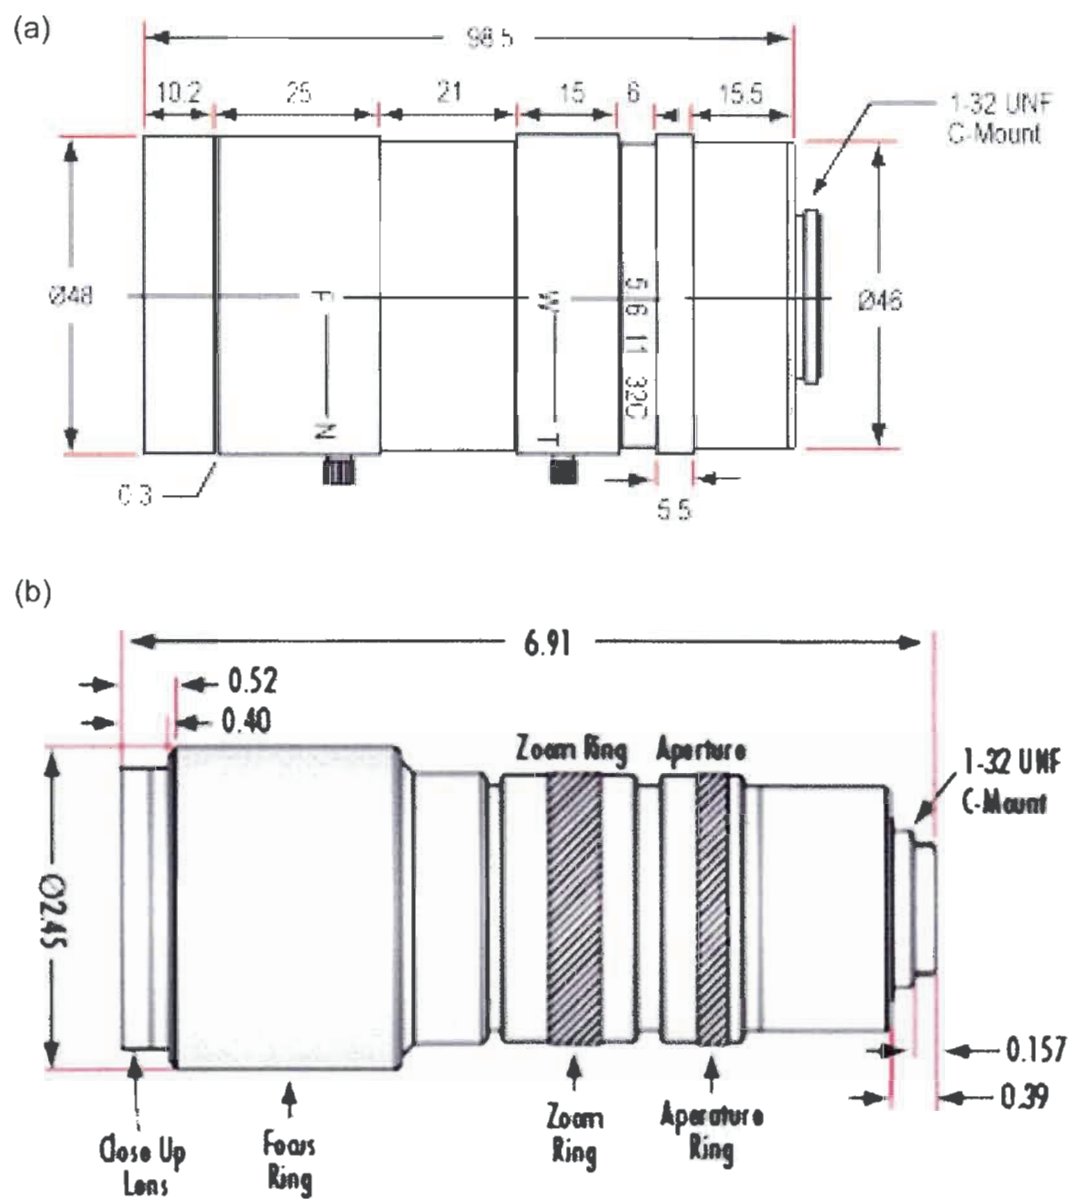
Dimensions of close focus zoom lenses. (a) Computer #54-363, dimension in mm. (b) Navitar Zoom 7000 #58-240, dimensions in inches.
